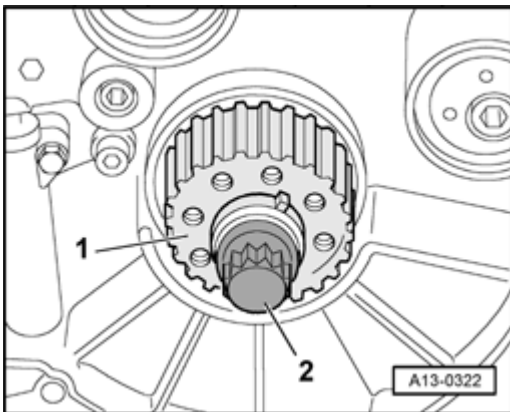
Removing/Installing Center Bolt For Crankshaft Toothed Belt Gear
